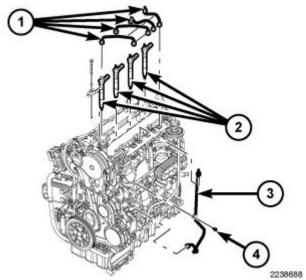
Vacuum Supply Tube Courtesy of CHRYSLER LLC
